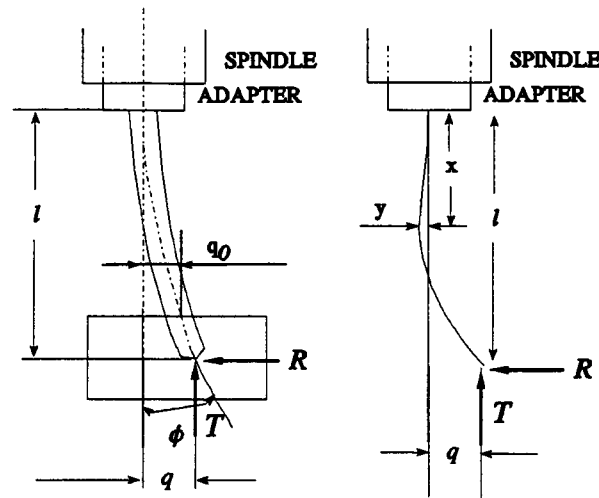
Schematic illustration of drill deflection and perpendicularity error for drilled hole.
